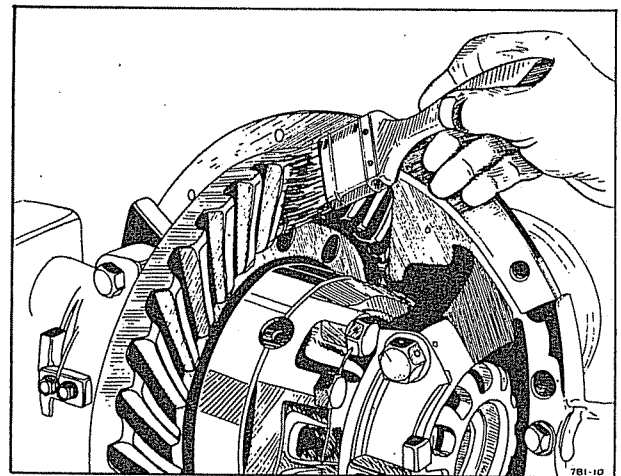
Applying Oiled Red Lead to Section of Ring Gear Teeth.
